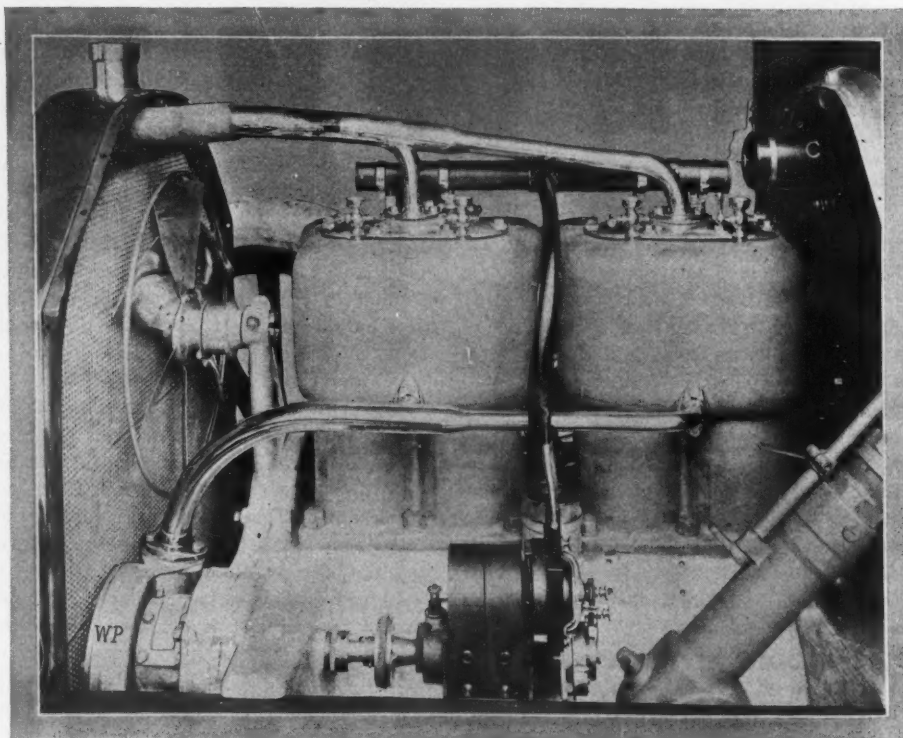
MAGNETO SIDE WITH STEERING GEAR LOCATION
